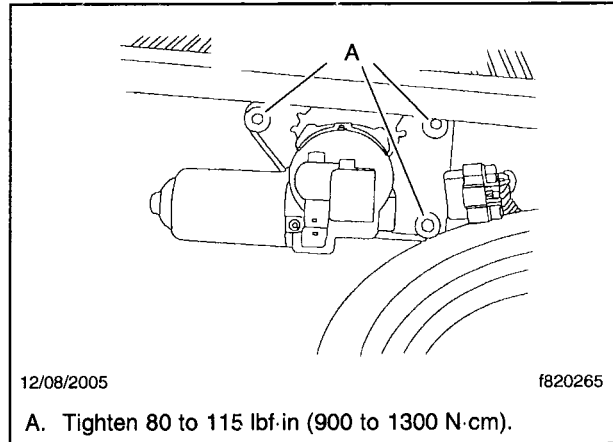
, Tightening Windshield-Wiper Motor Bolts
